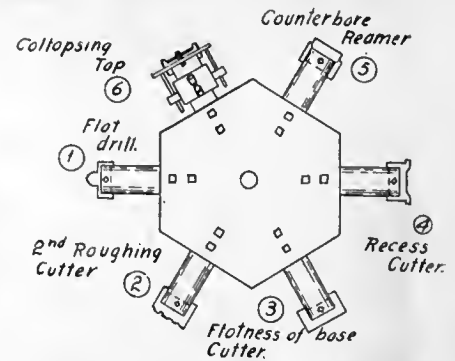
TOOLING FOR BASE PLATE RECESS.
